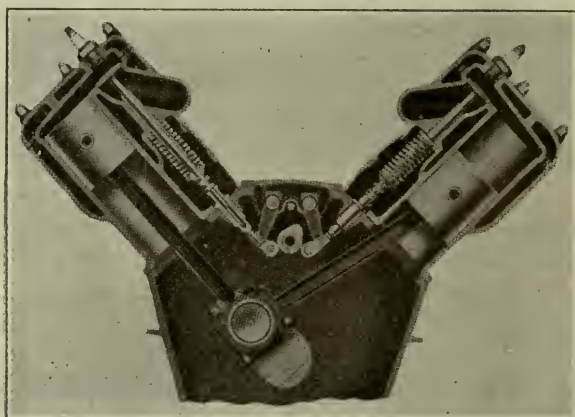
Cadillac 8 Valves and Cam Shaft Arrangement.
